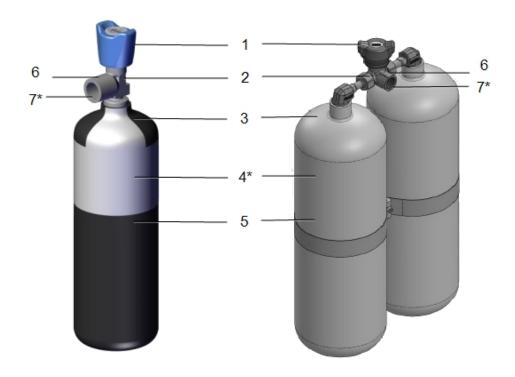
Overview composite compressed air cylinder with cylinder valve / M1 TwinPack
